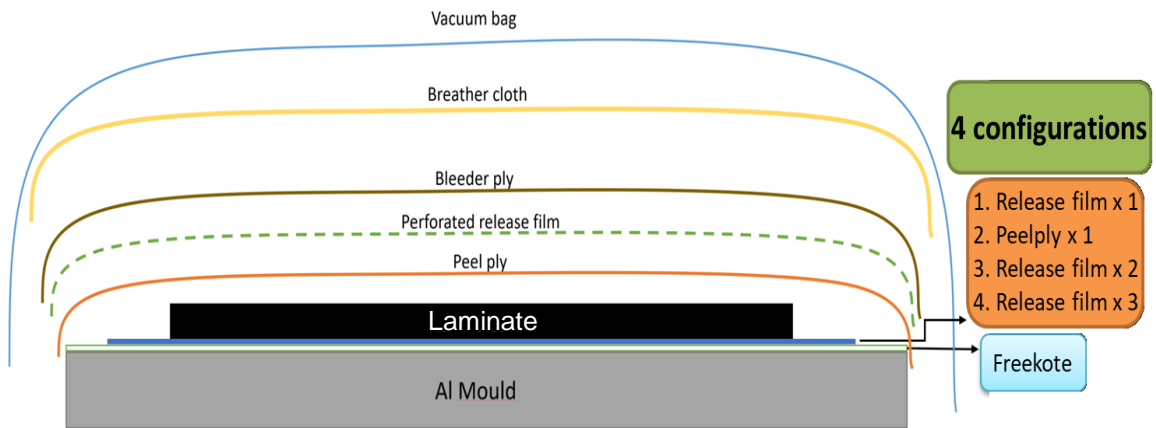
The arrangement of mould surface conditions and bagging products.
